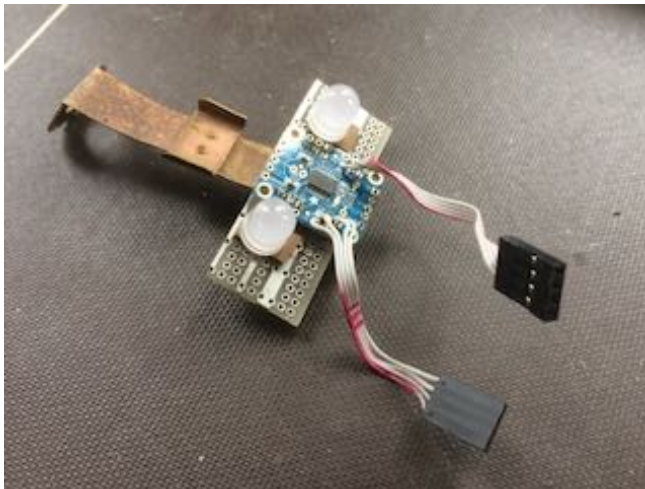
Lamp and speaker assembly showing eyes and PWM driver board. The flanges at the midpoint hold the speaker in place.
